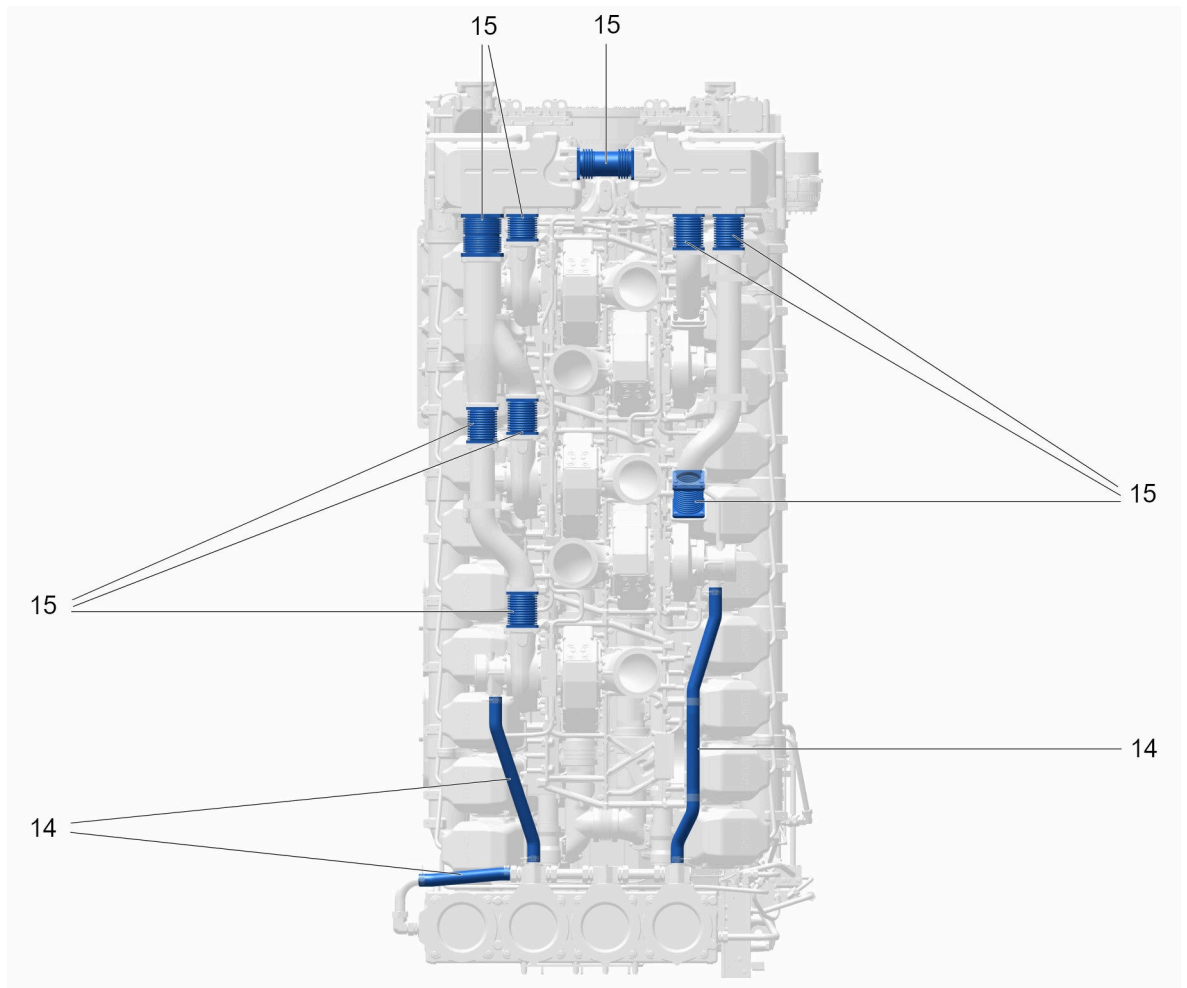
Visual inspection of Diesel engine (3)
